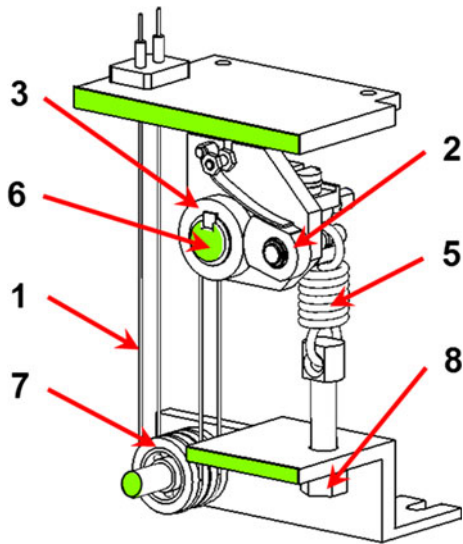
Implementation of the SMA wire-based rotary actuator. 1, SMA wire; 2, friction pawl; 3, friction ratchet wheel; 5 bias spring; 6, shaft; 7, pulleys; and 8 adjusting nut
